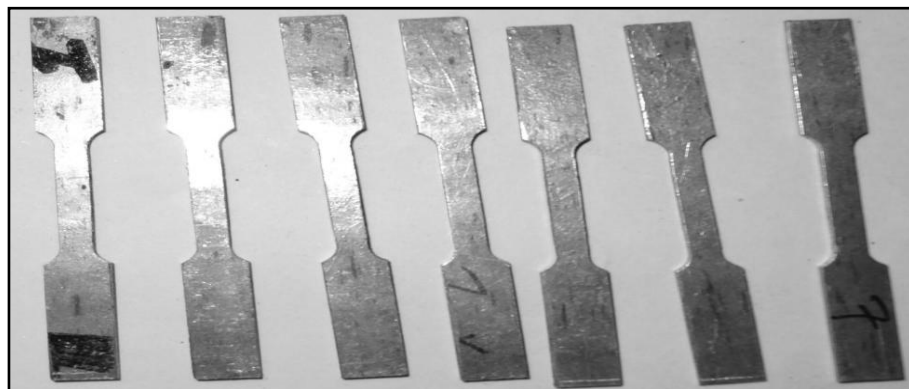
Tensile test pieces punched-out from rolled strips
